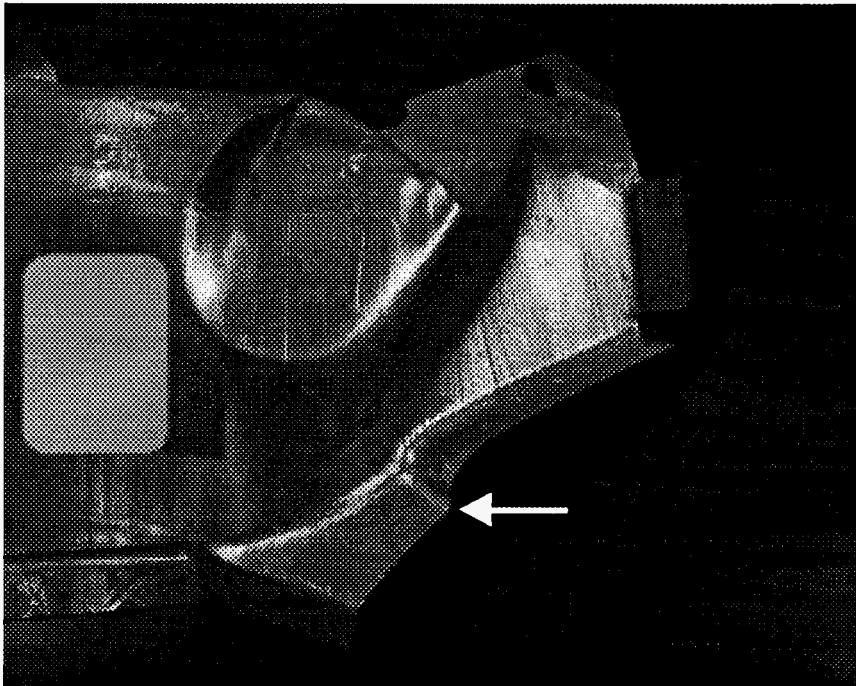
Shock tower part after general impact testing showing buckling at the flange indicated by the arrow
